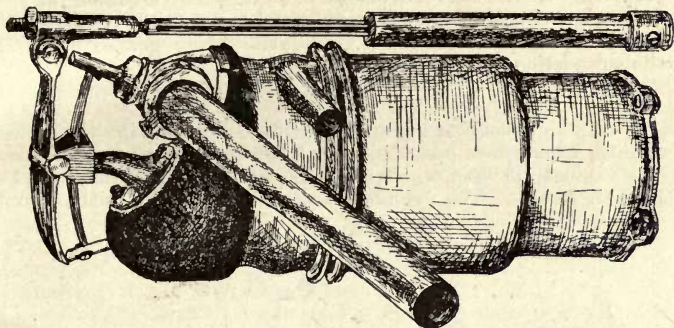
One of the cylinders and the valve gear of a Bayard-Clement engine.
